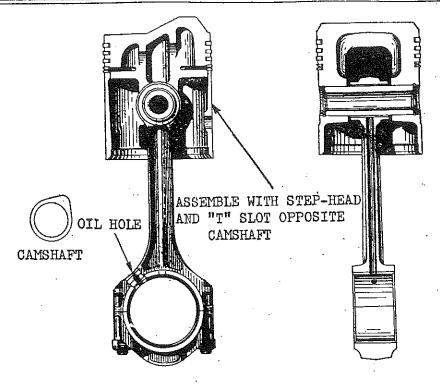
Correct assembly of piston and rod on 213, 228, 230, 236, 248, 256 and 270 engines
